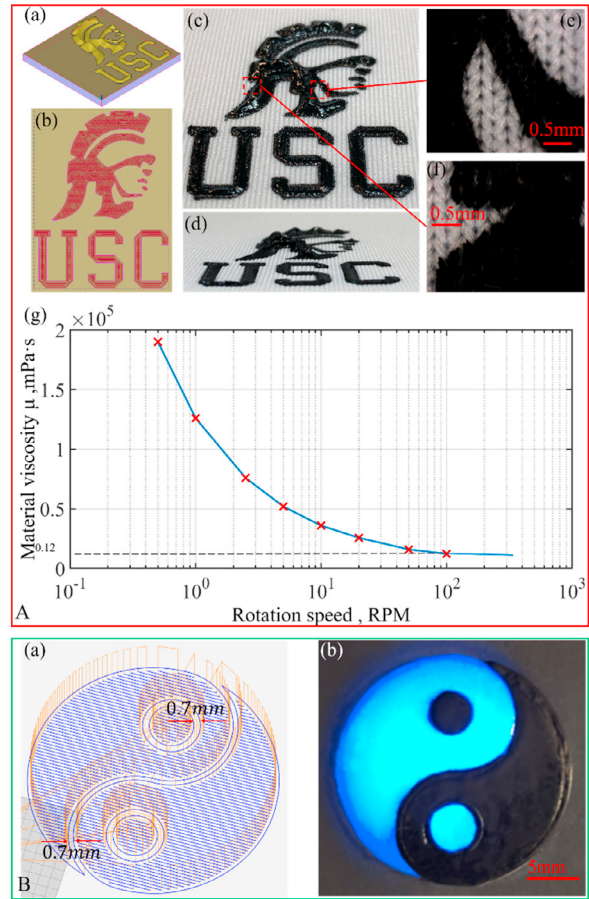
Demo of 3D printing structures. (A) A USC Trojan logo printed on a piece of fabric. (a) CAD model; (b) tool path of the whole part (26 layers); (c) (d) the fabrication result; (e) (f) microscopic images showing the details; and (g) rheological property of the used PU leather ink. (B) Multi-layer stacked Tai Chi pattern printed using multiple materials. (a) The tool path of one layer; and (b) the fabrication result.
